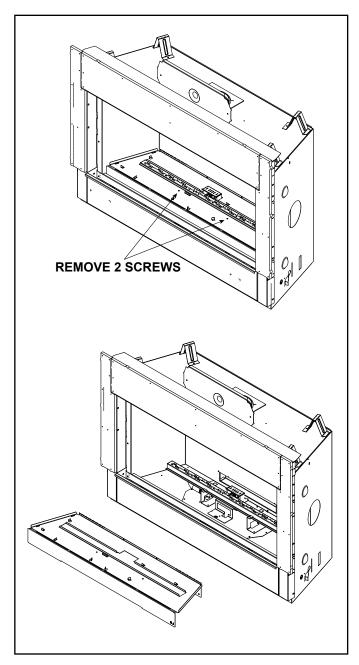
Base Pan Removal - Rave4013-IFT Shown
